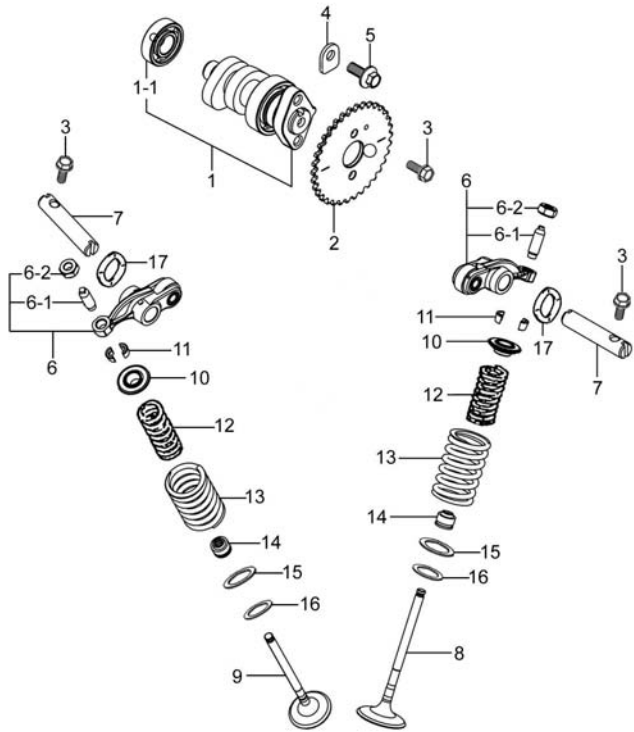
CAMSHAFT-VALVE (P12-S070-0005)
